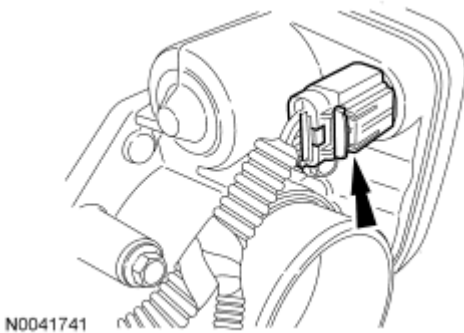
Locating Electronic Throttle Body Electrical Connector
